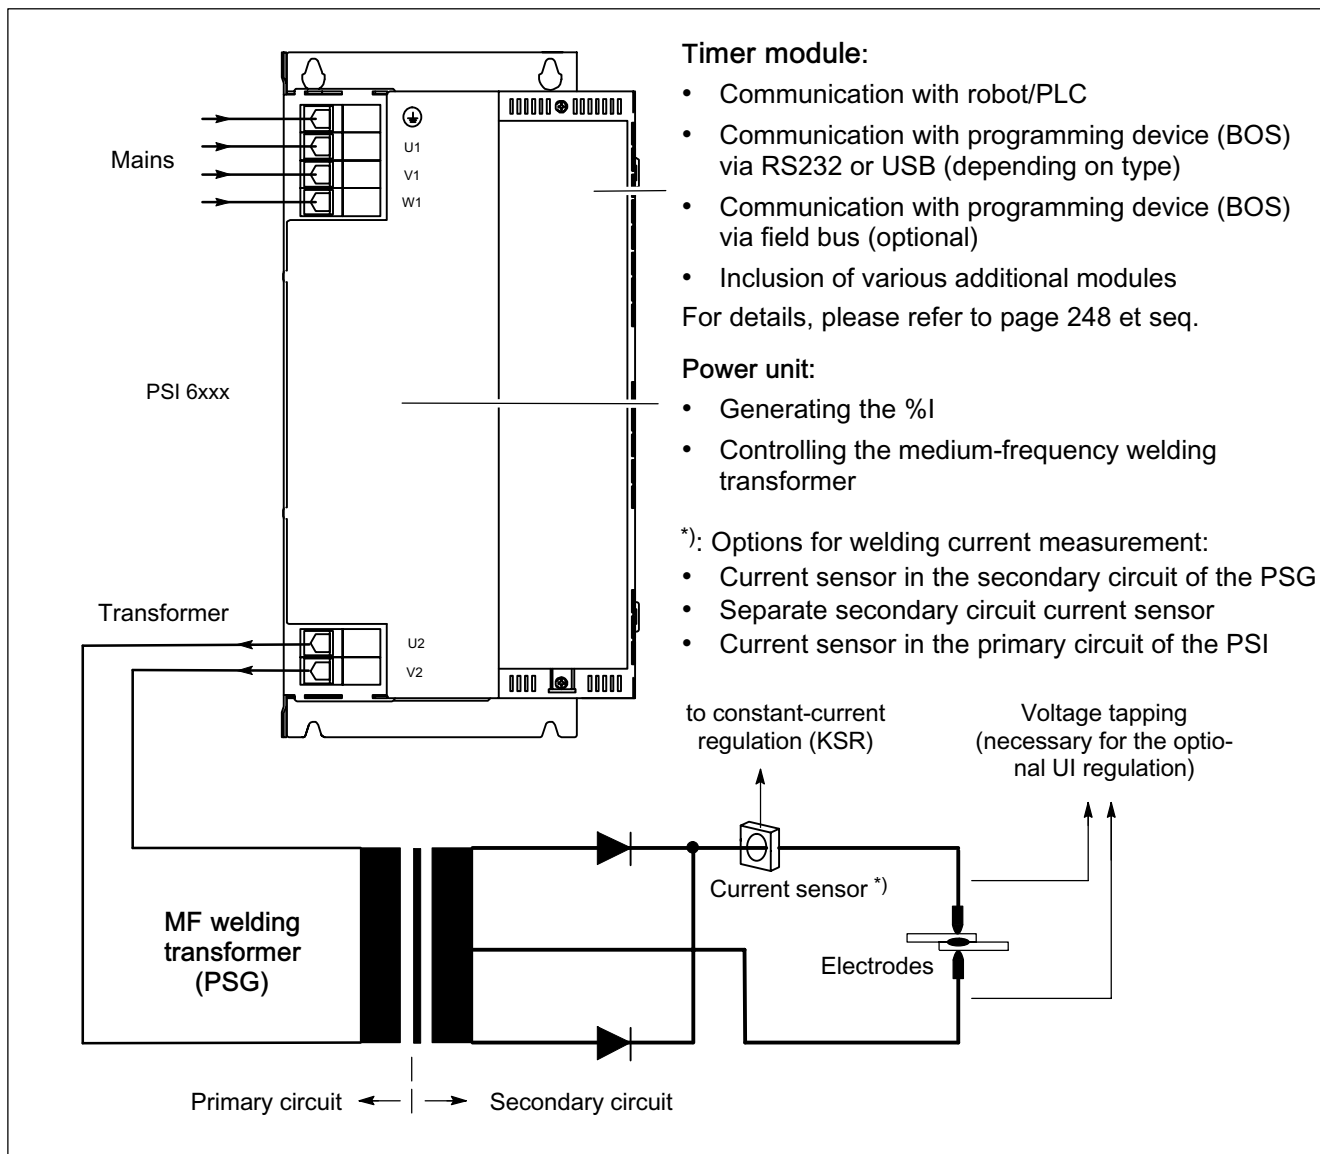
General structure of an MF welding system with PSI 6xxx
